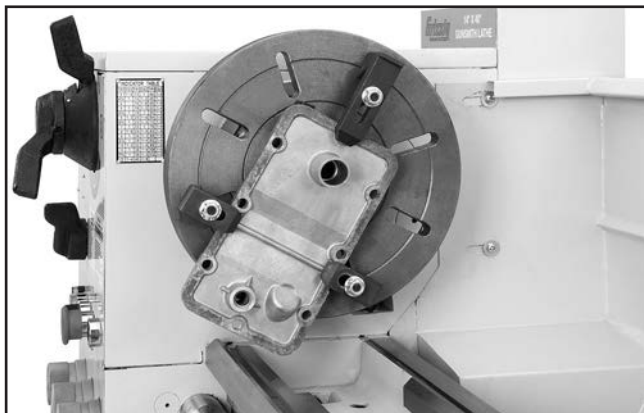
Workpiece properly clamped on the faceplate in a minimum of three locations (tailstock removed for clarity).
